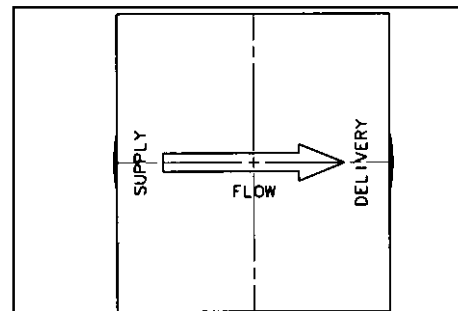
BOTTOM VIEW - SHOWS AIR FLOW
